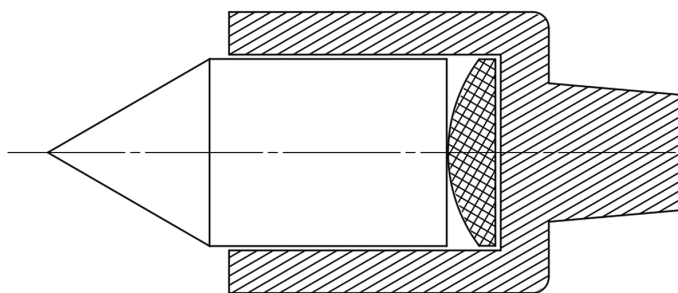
The first revolving tailstock centers needed constant oiling because they had simple plain bearings and a brass pad to receive the thrust load.
